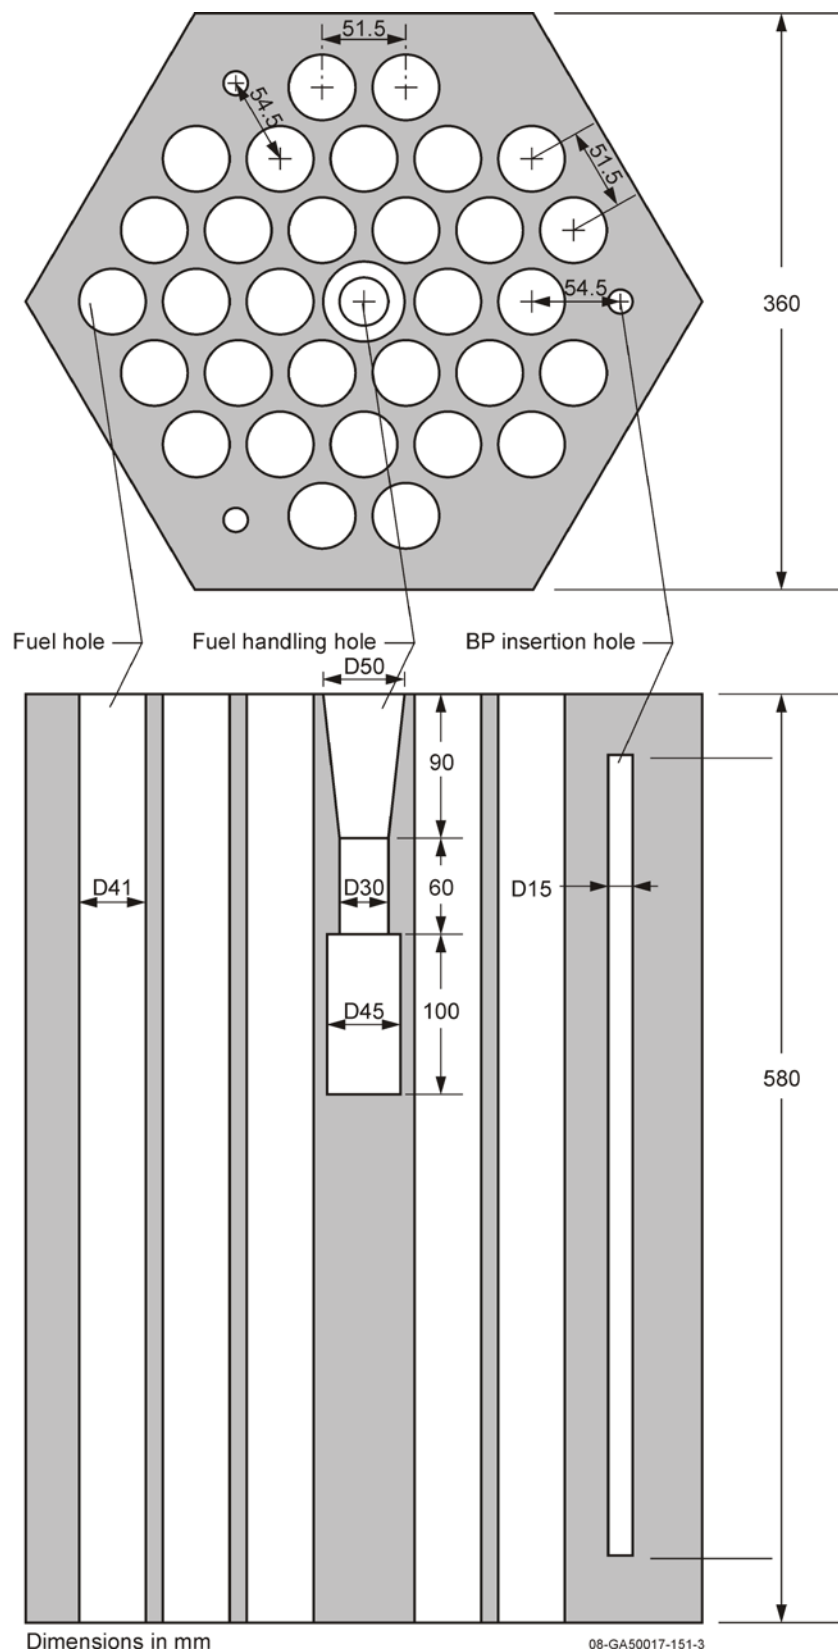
Fuel block for 31-pin fuel assembly. Dxx represents the diameter in xx (mm).
